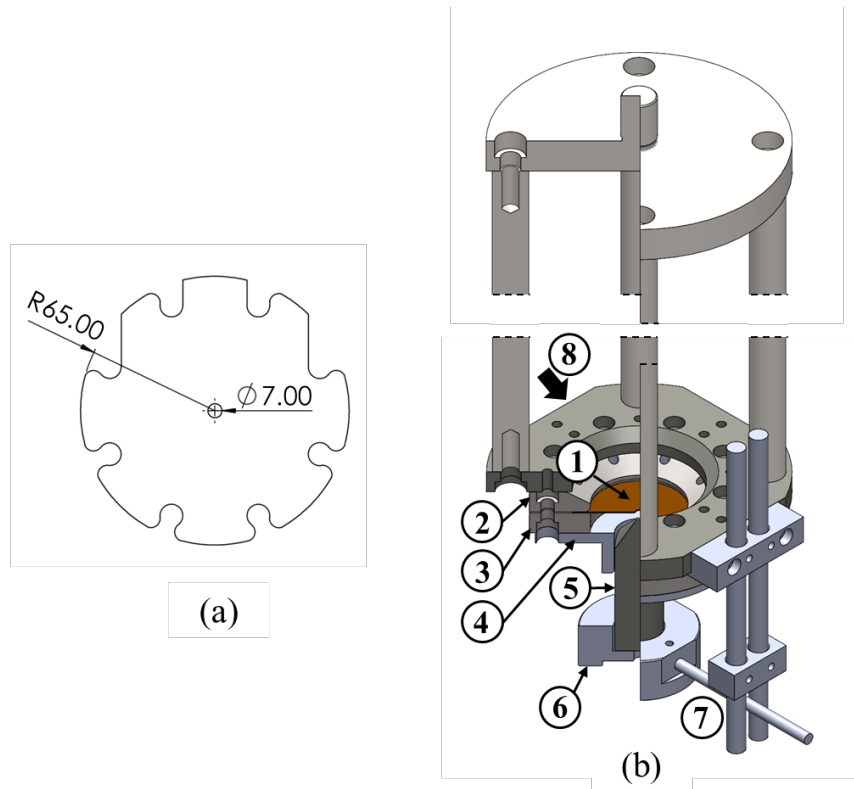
(a) Specimen, and (b) experimental setup of the Asymmetric Hole Expansion Test: (1) specimen, (2) die, (3) blank holder, (4) punch guide, (5) asymmetric hole expansion punch, (6) punch holder, (7) auto-alignment system, and (8) direction of the cameras.
